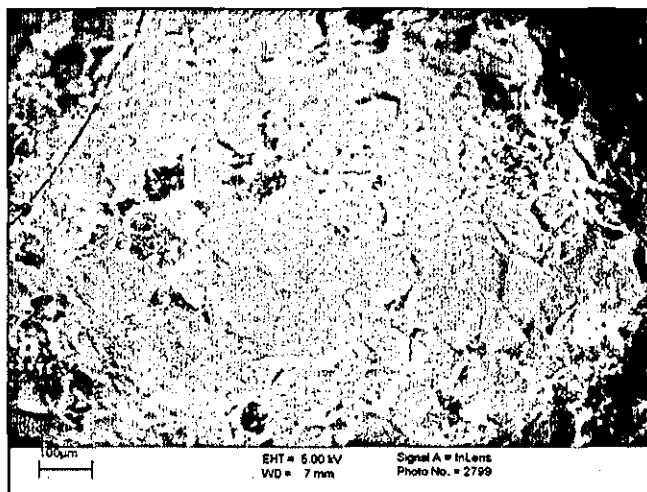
Fracture surface of partially sintered SFD24 powder compact.
